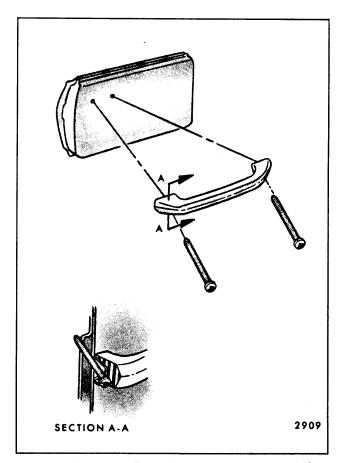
Door Pull Handle Attachment - "F" Styles
